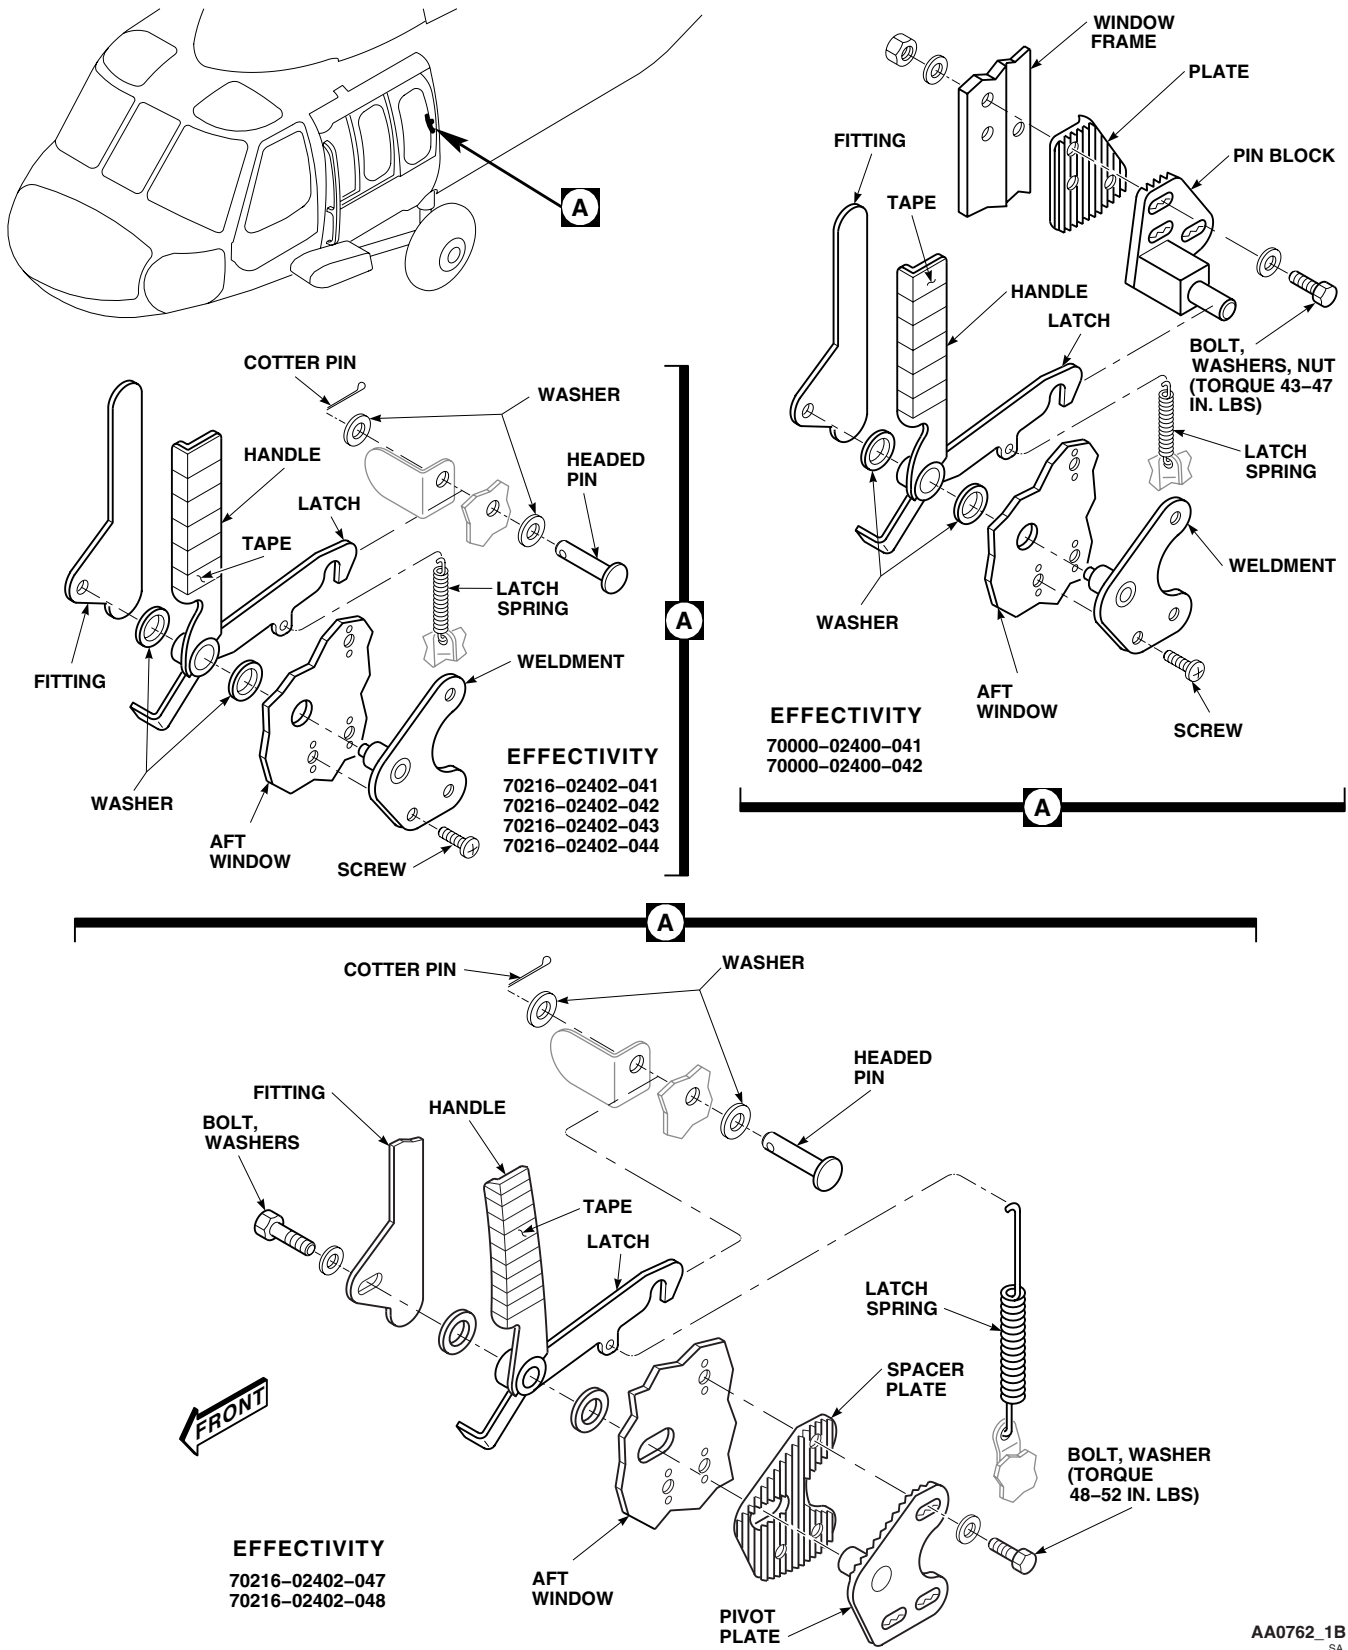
Replace Gunner's Window Latch Assembly. (Sheet 1 of 2)
